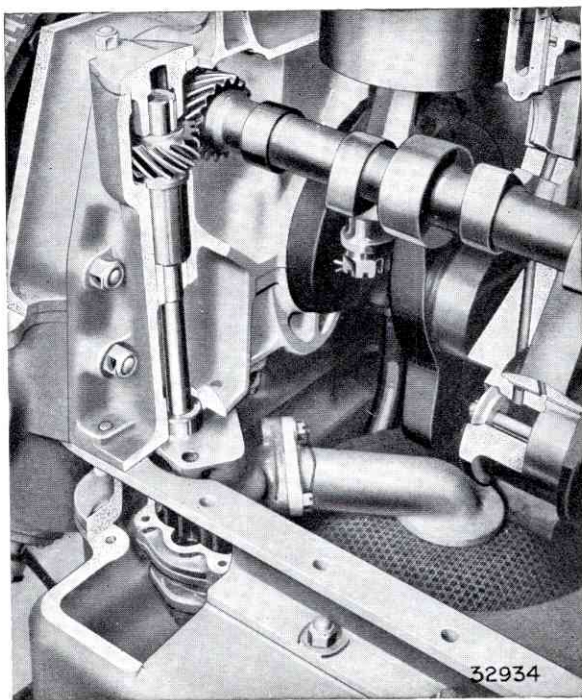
OIL PUMP DRIVE FROM CAMSHAFT
